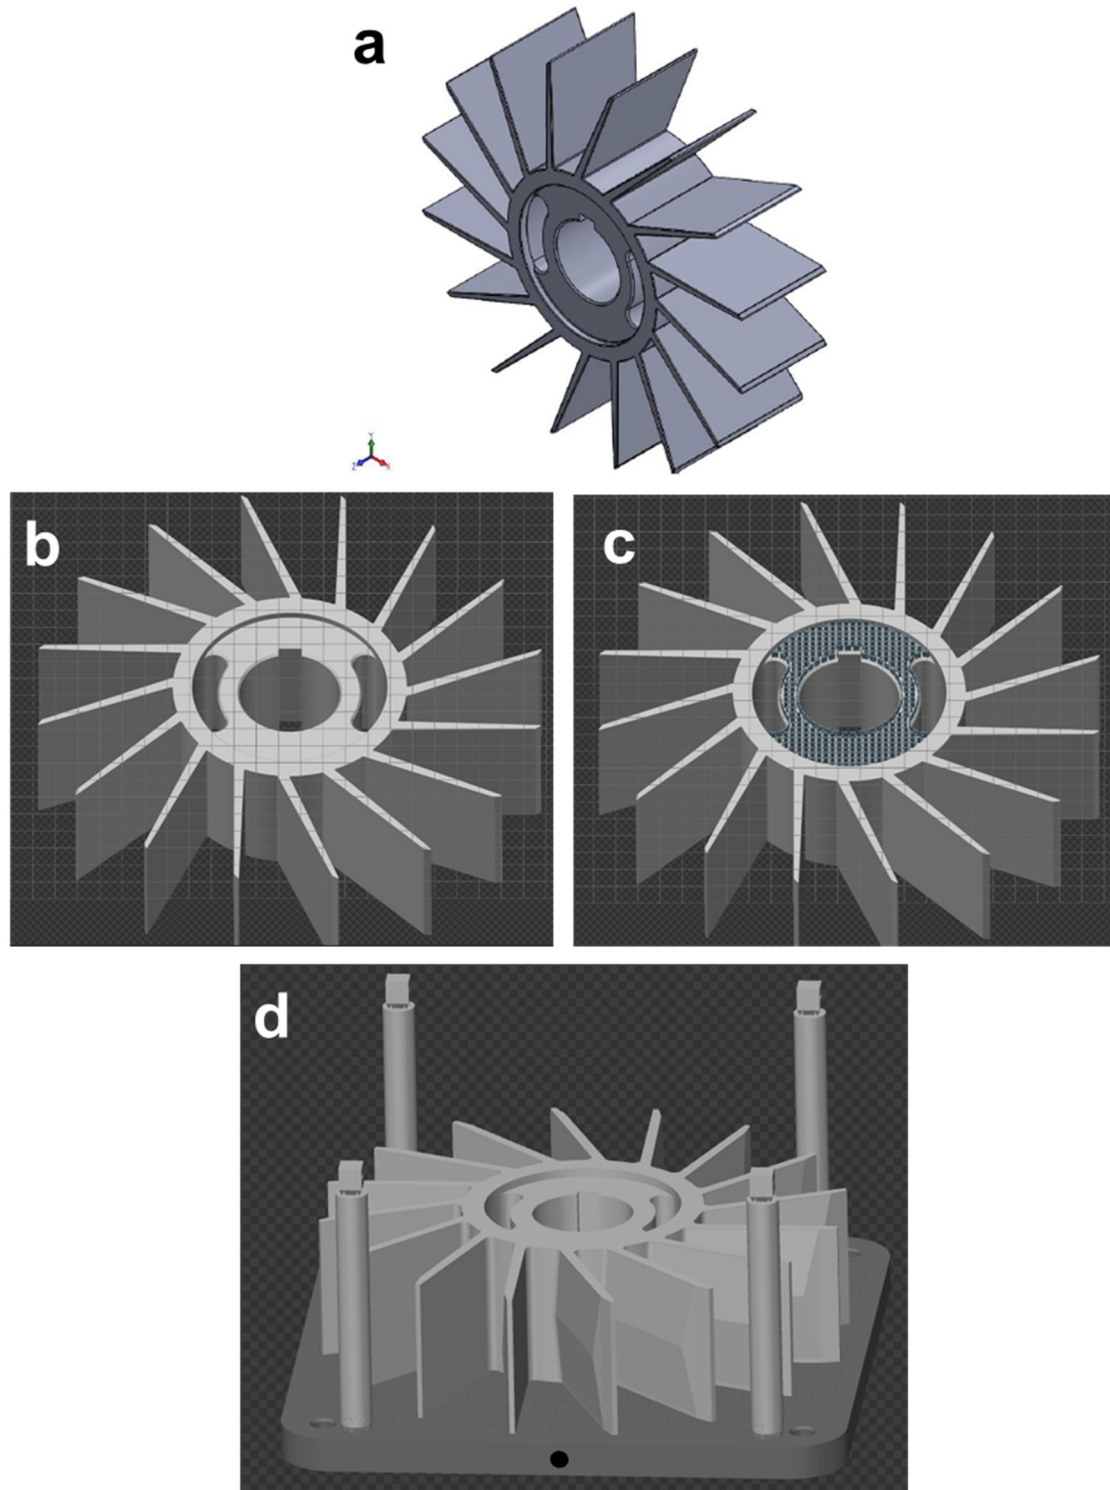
SLM impeller digitizing and CAD design: a) scanned geometry; b) scan view without supports; c) scan view with supports; d) 3D view with test coupons for material quality check.
